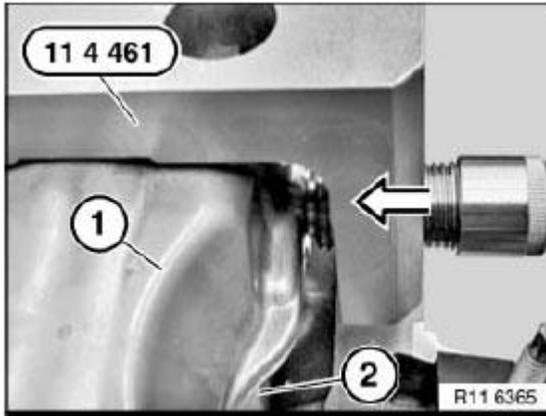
Tightening Special Tool 11 4 461 Screw To Ground Surfaces
